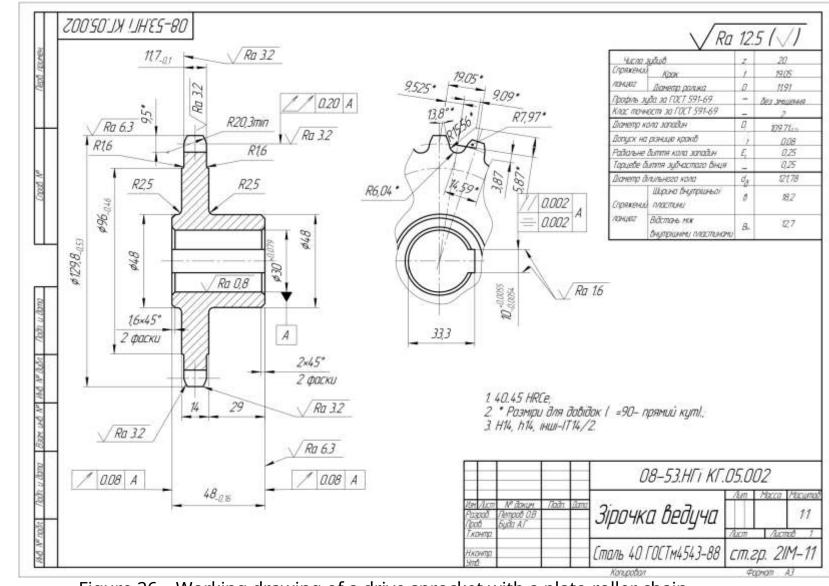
Working drawing of a drive sprocket with a plate-roller chain
